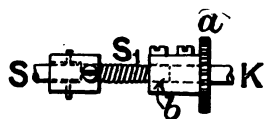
Piece connecting Winding-Gear and Clockwork.
